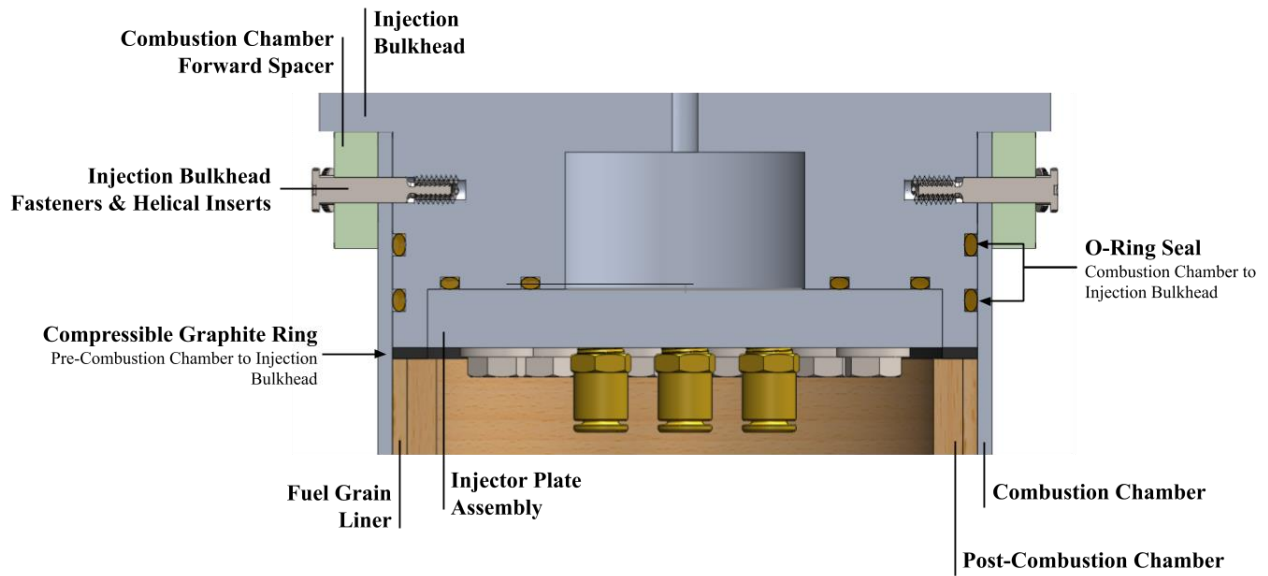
Integration of Injection Assembly and Thrust Chamber Assembly
